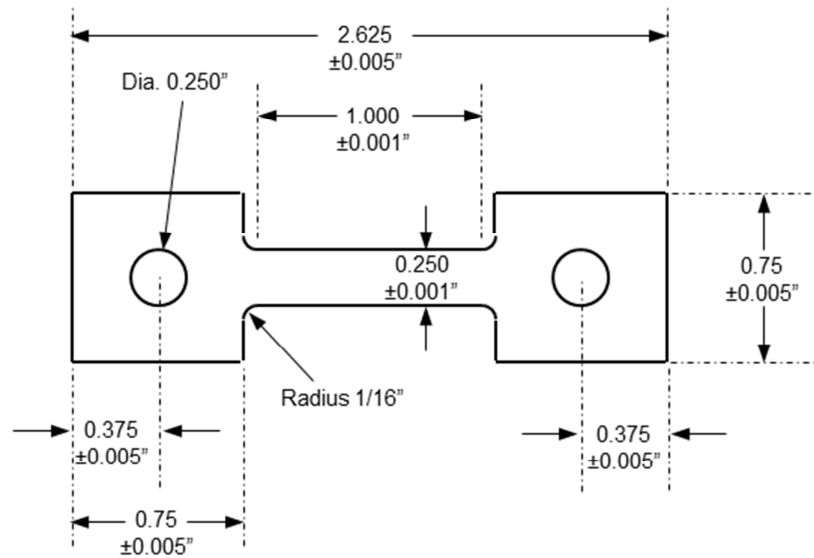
Drawing of specimens used in this study. Dimensions are in inches. Sheet thickness is as received.
